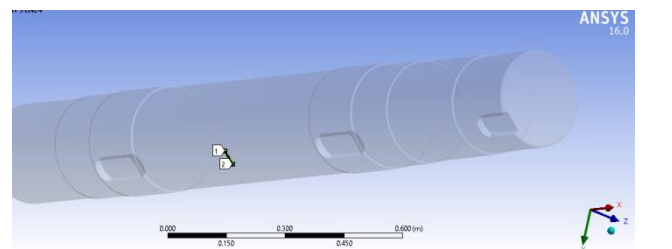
Modified Shaft Design 3 with Materials EN24 Fracture Analysis-SIFS K3
